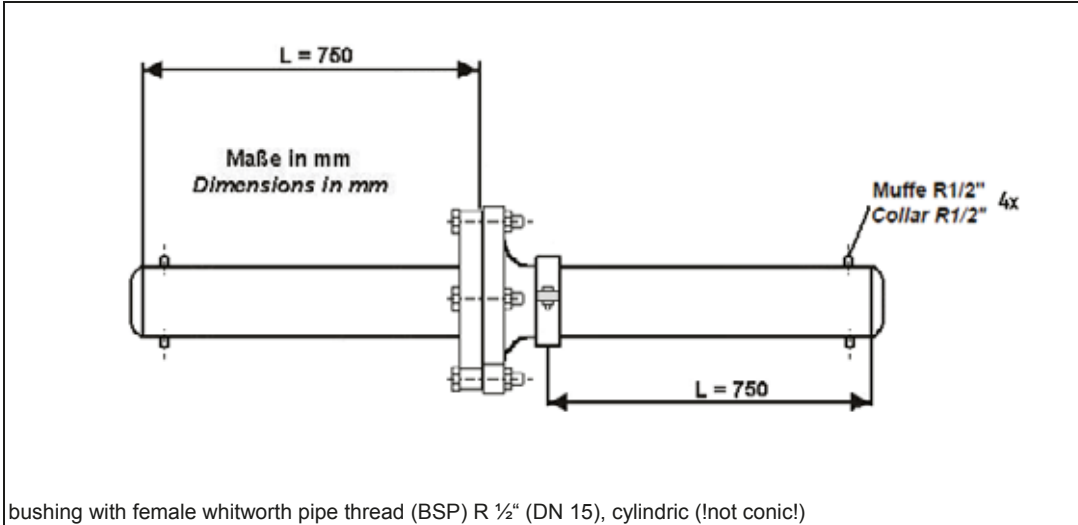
Test sample assembly for pipe fittings – flange adapter
